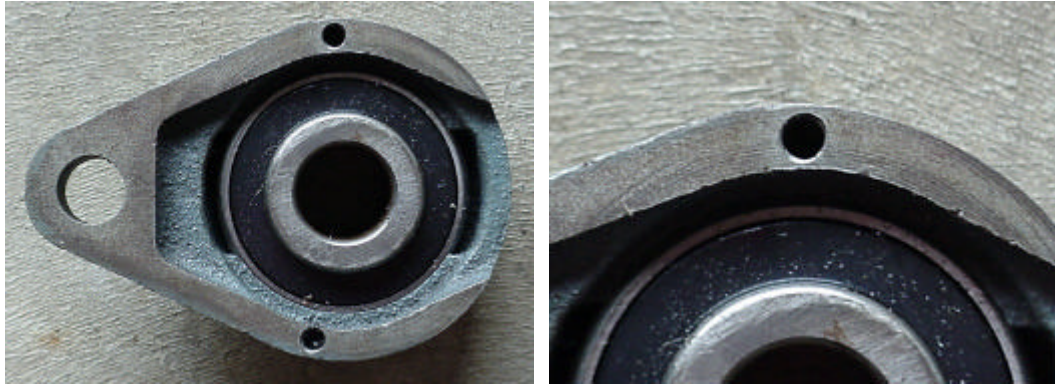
Drilled and tapped bearing flanges to suit $\text{Æ}3/16''$ BSW gutter bolts
